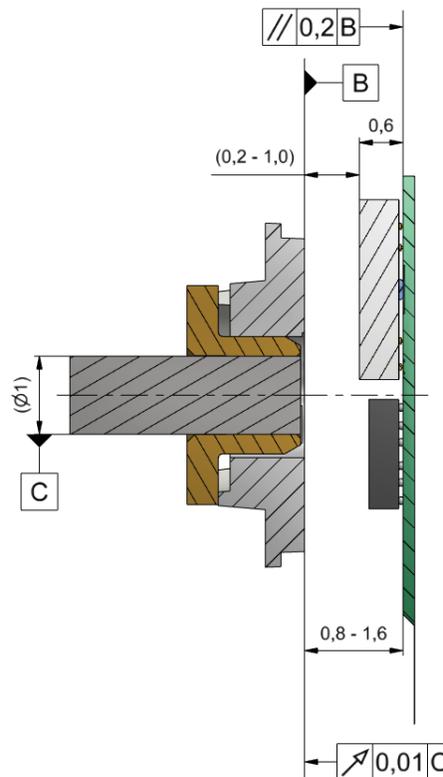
Sectional view X-X (Figure 5), assembled state (customer-specific shaft and adapter)
